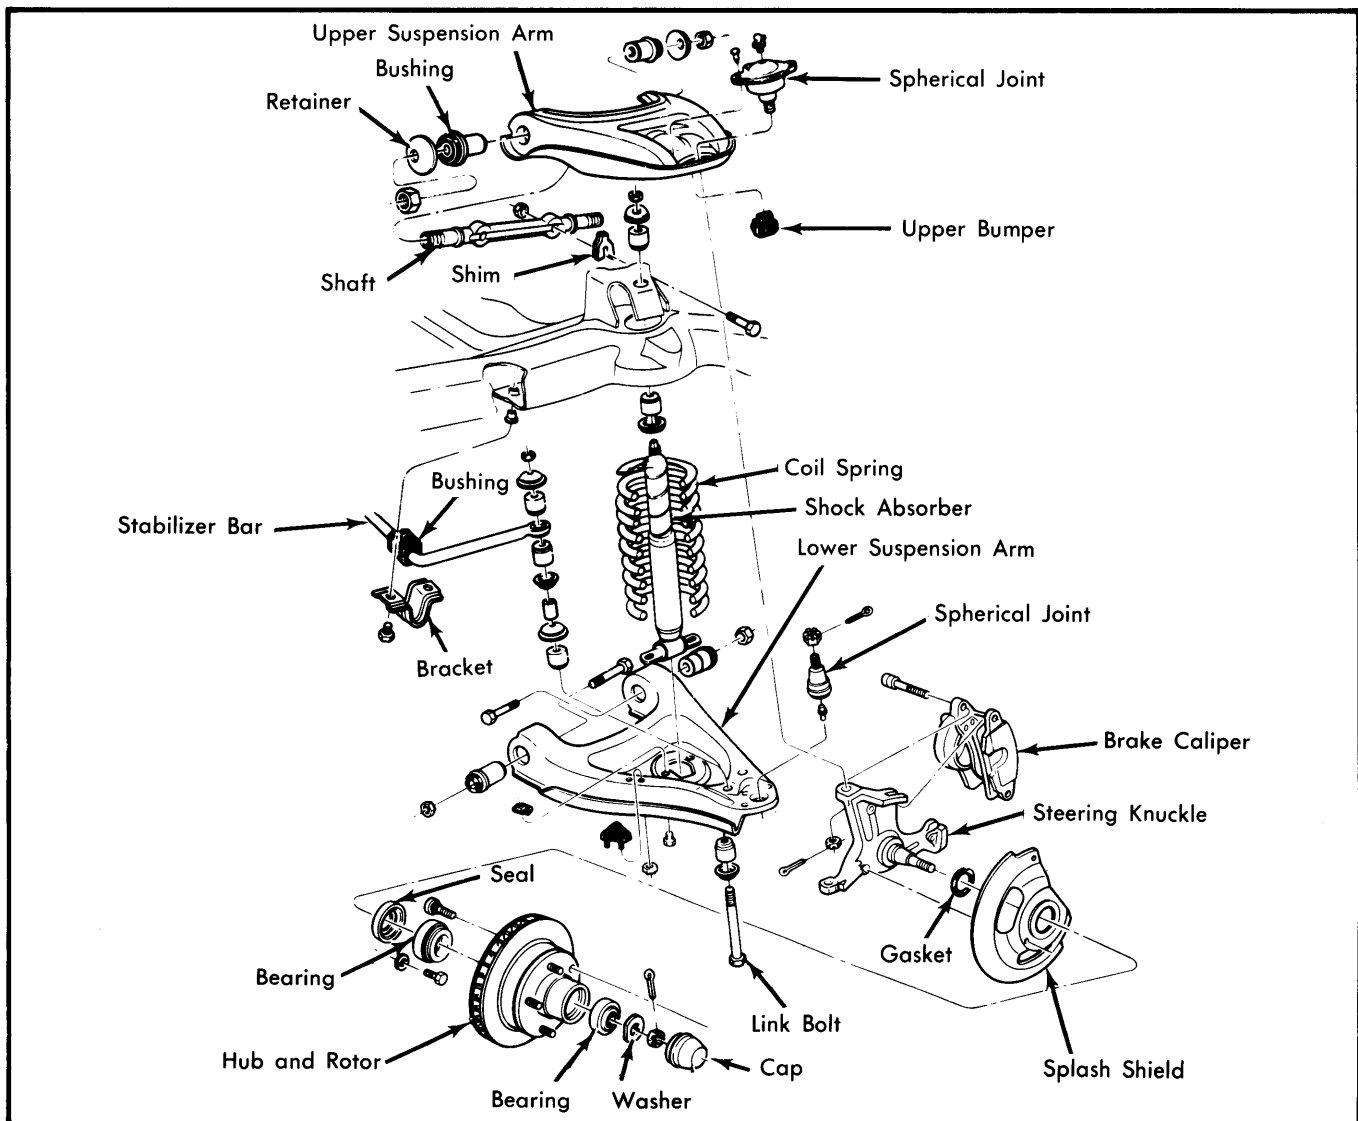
Cadillac Front Suspension (Rear Wheel Drive Models)
